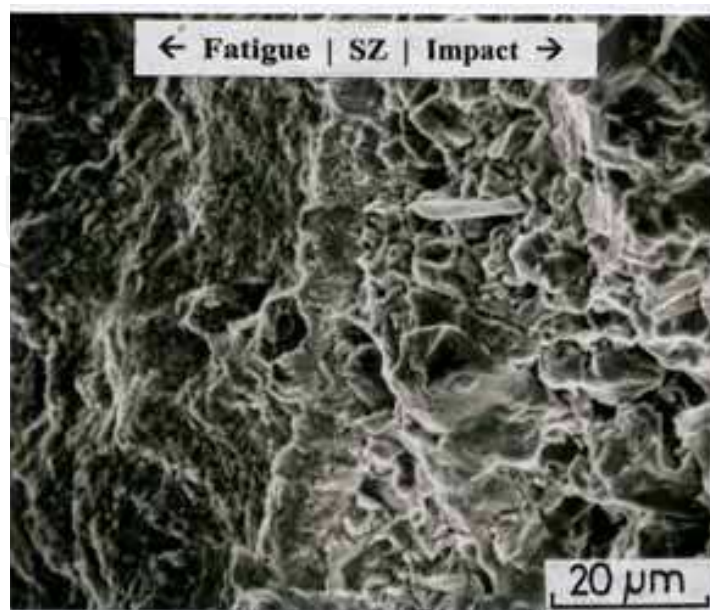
Stretched zone between fatigue and impact fracture surface [2]. Flange yolk forging die
